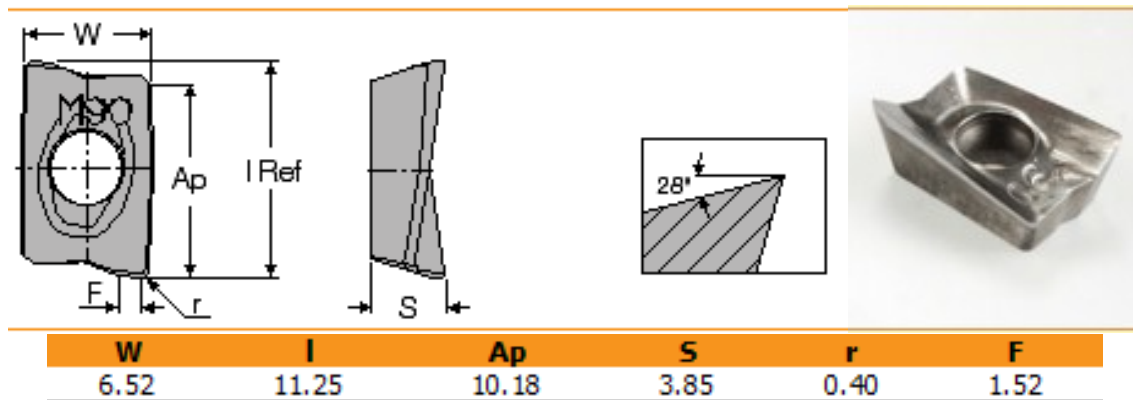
Iscar milling insert with relevant dimensions [155].
